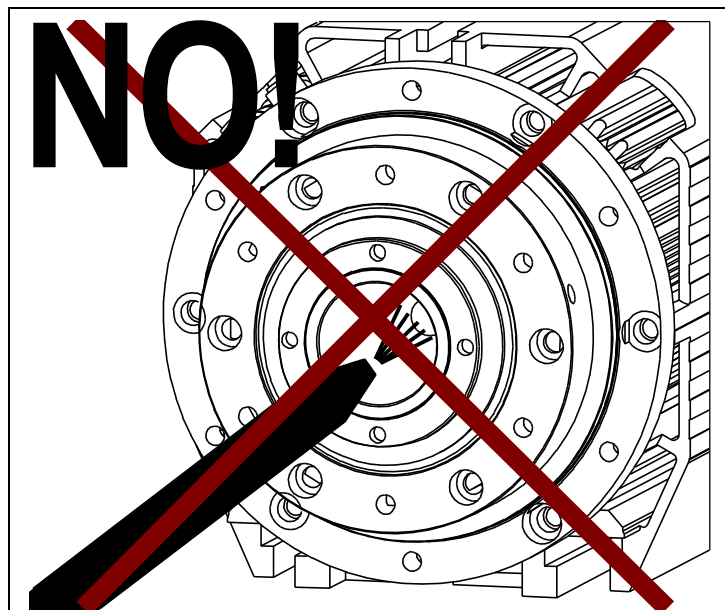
Follow the instructions in section 12.1.1 to clean the tool holder housing in the spindle nose.
